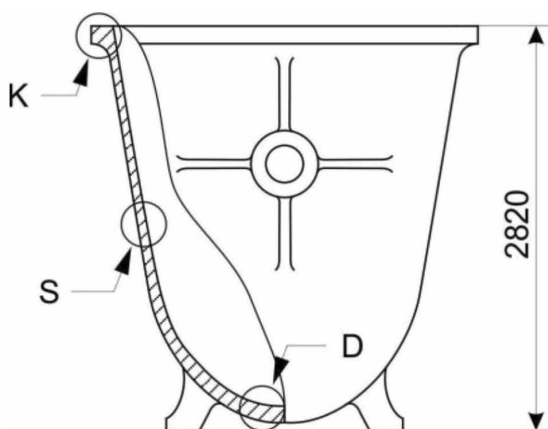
Scheme of cutting out samples from slag ladle casting: D – bottom; K – flange; S – half-height of side wall of slag ladle
